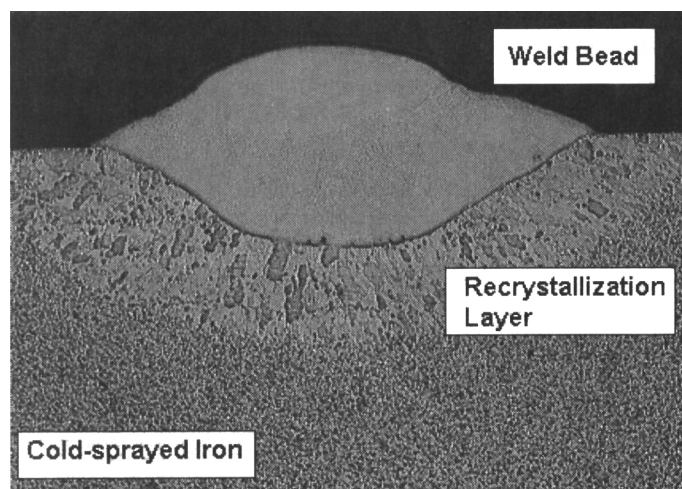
Filler-metal weld bead formed on cold-sprayed iron structure, showing a recrystallized layer and grain growth below the bead. Source: Ref 19
